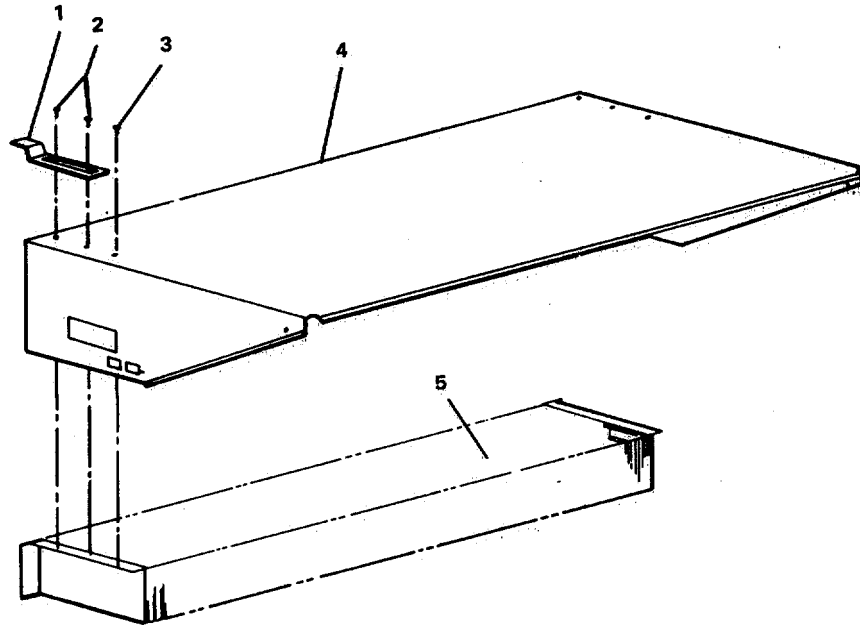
Repair Refrigerator - Refrigeration Evaporator Coil.
